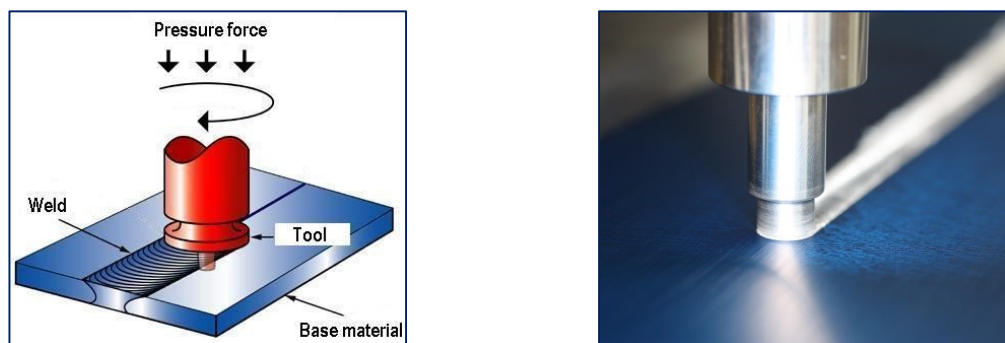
Process and Principle of Friction Stir Welding Process [39] [47]
